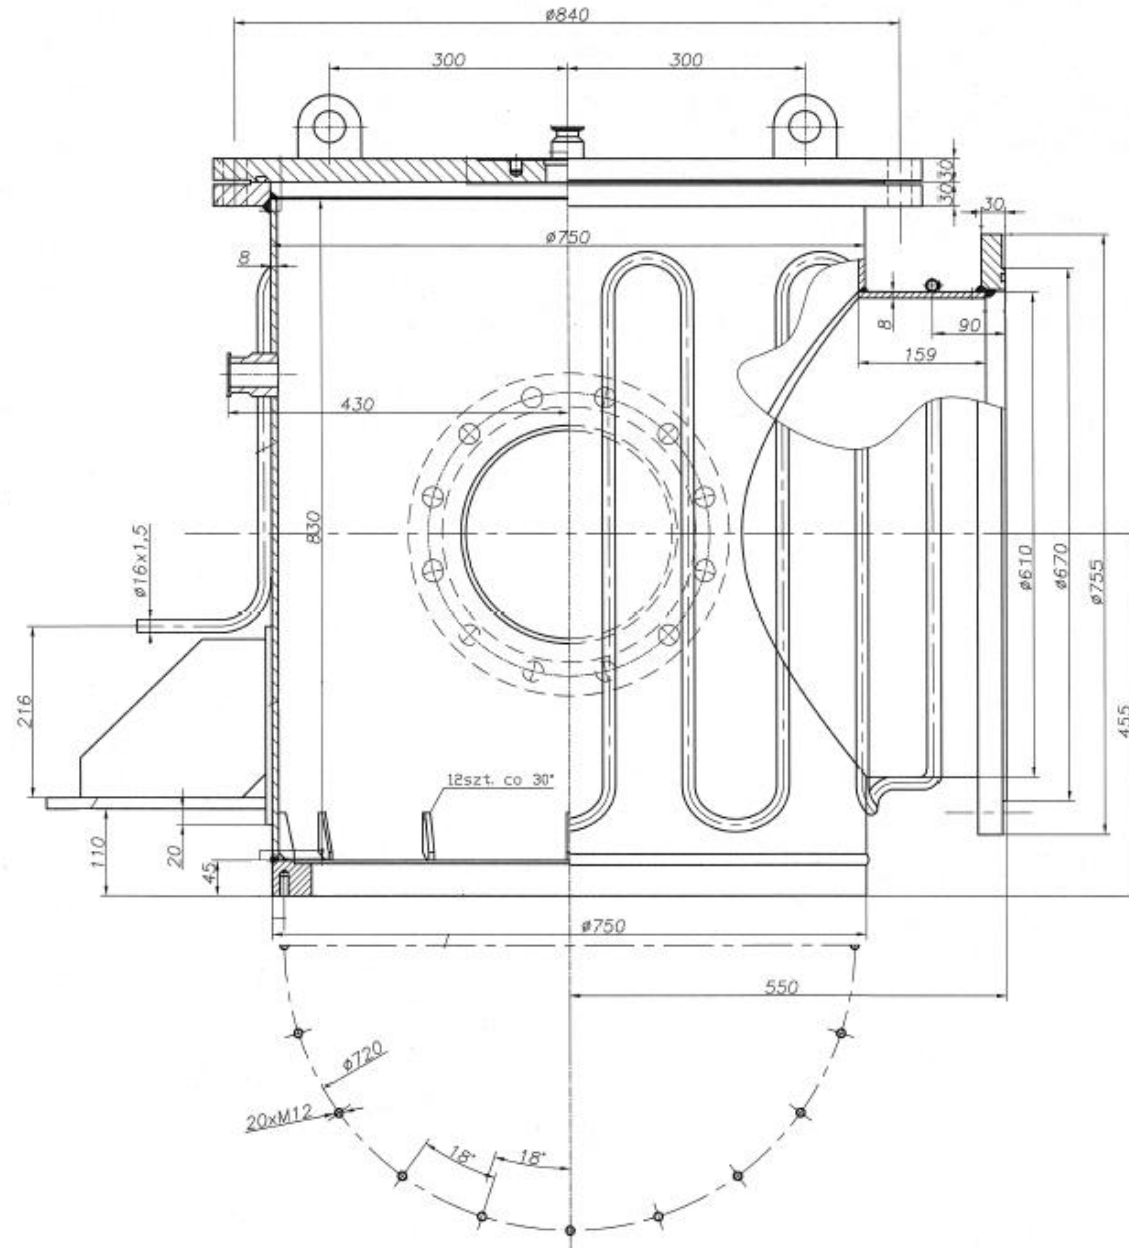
Drawing of valve made of stainless steel 0H18N9
